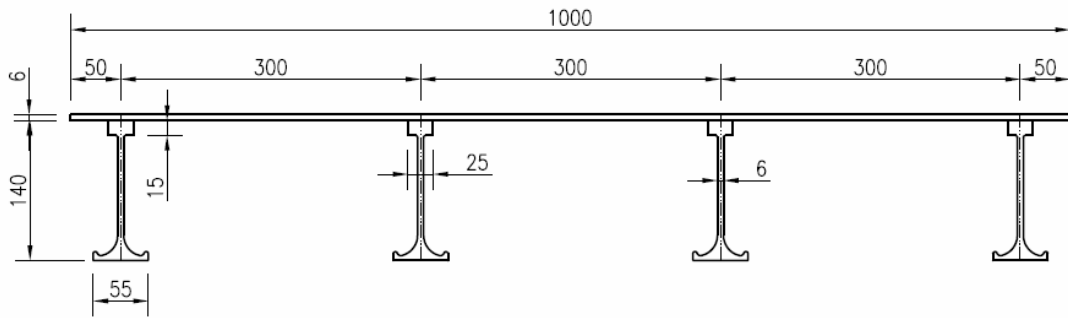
(f) Layout of test structure 20D2 for friction stir lap-joining in mm
